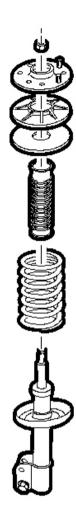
Upper Mount Assembly, Strut Dust Shield, Strut Shaft & Spring Courtesy of GENERAL MOTORS CORP.
